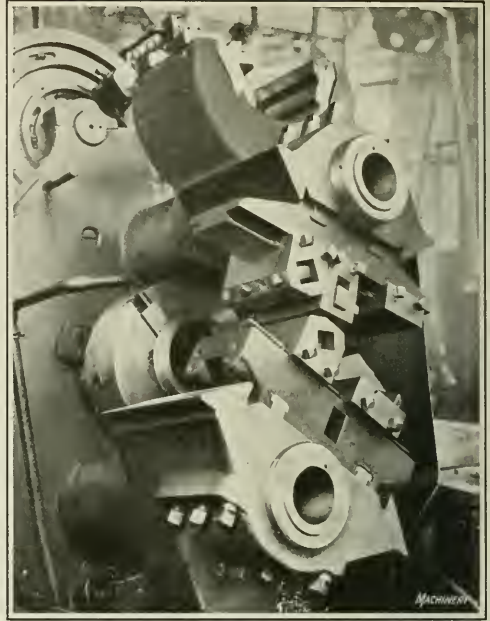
Close-up View of the Equipment used in machining a Ball Bearing Race, shown in Fig. 13
